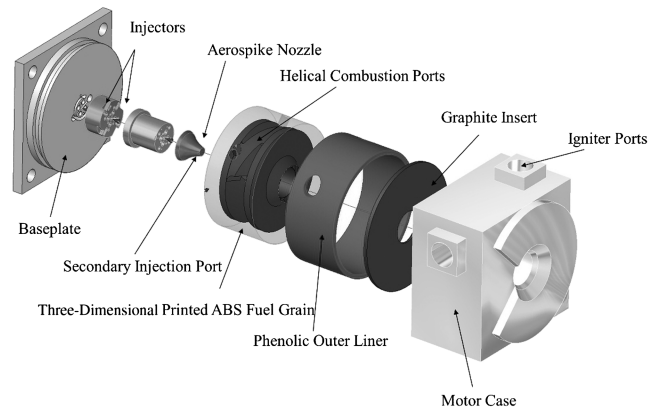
Exploded view of prototype MUPHyN thruster assembly.
